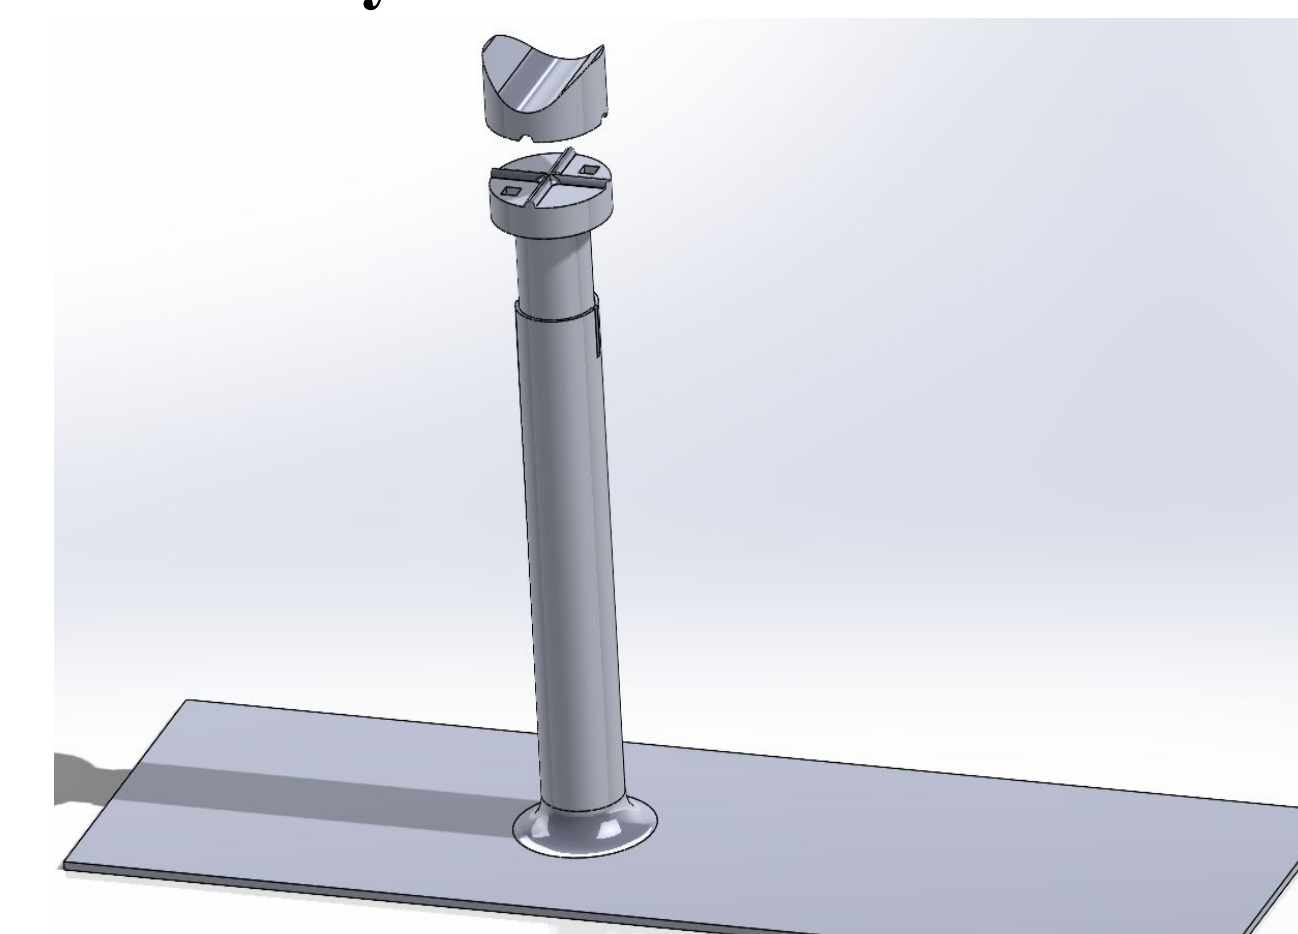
Solidworks assembly; all three components combine to hold the catheter handle above the patient's leg and the sterile drape at the optimal height
